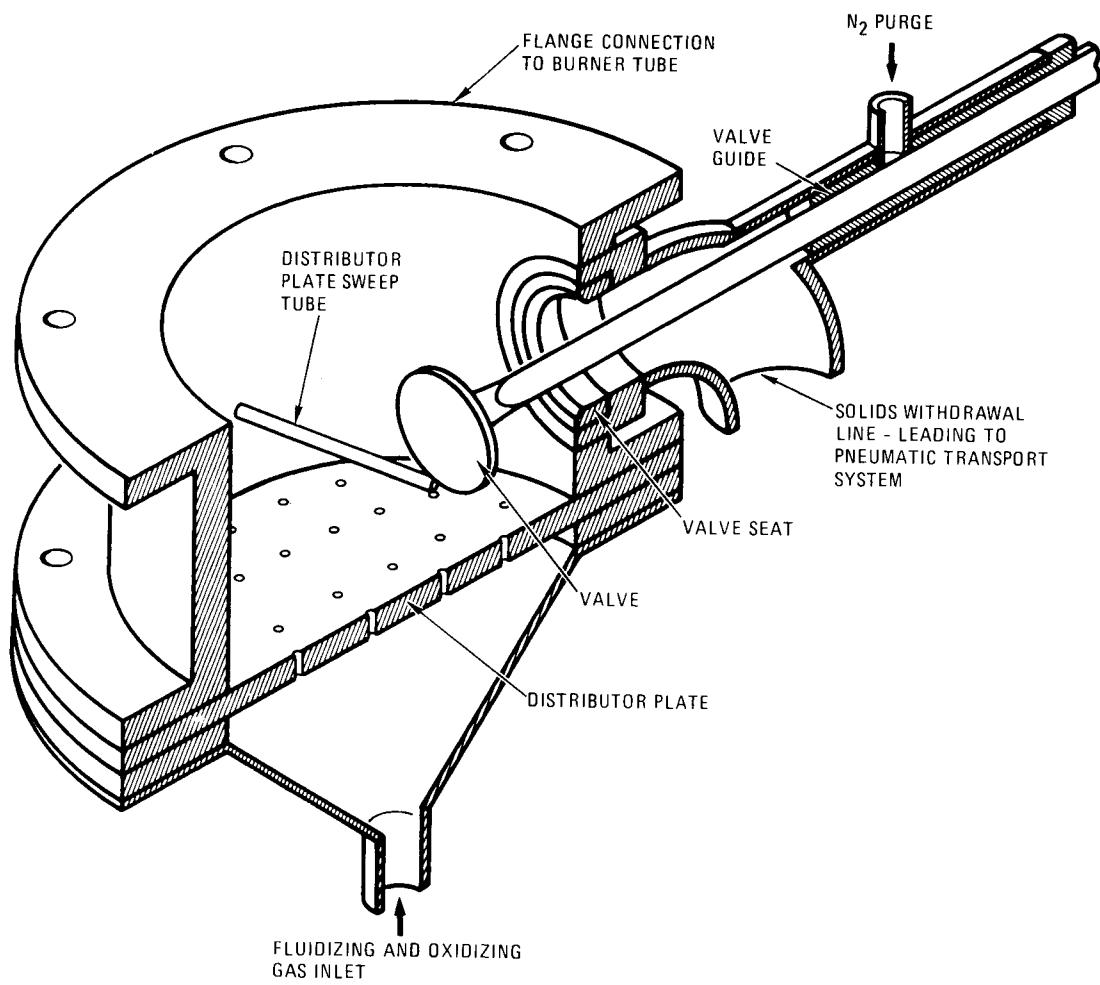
High temperature bed removal system for 10-cm secondary fluidized bed burner
